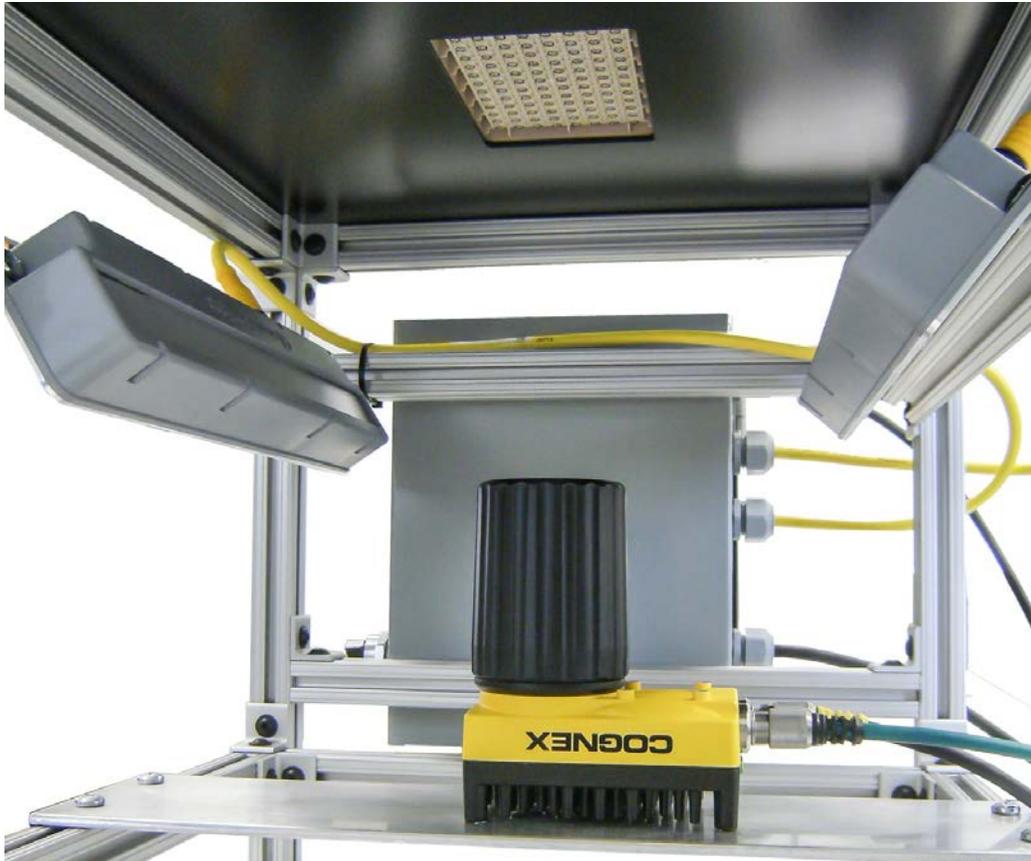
Side view of fixture with Cognex camera, light bars, and specimen tray.
